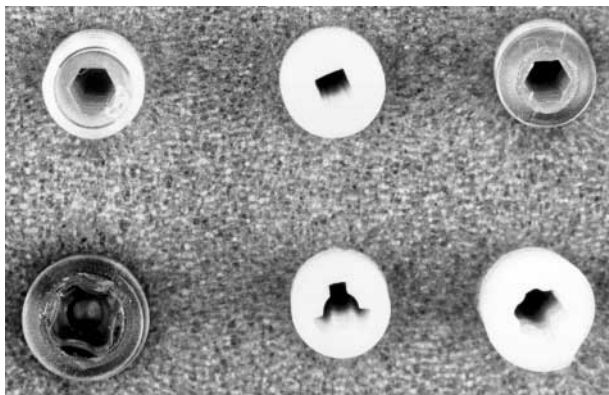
Cross-sections of screws shown in Fig 5. The variation in screwdrivers necessary for removal includes a tapered hexagonal, quadrangular tapered, 2.8-mm hexagonal screwdriver, quadrangular, trilobe, and “Six-star” torx screwdrivers.
